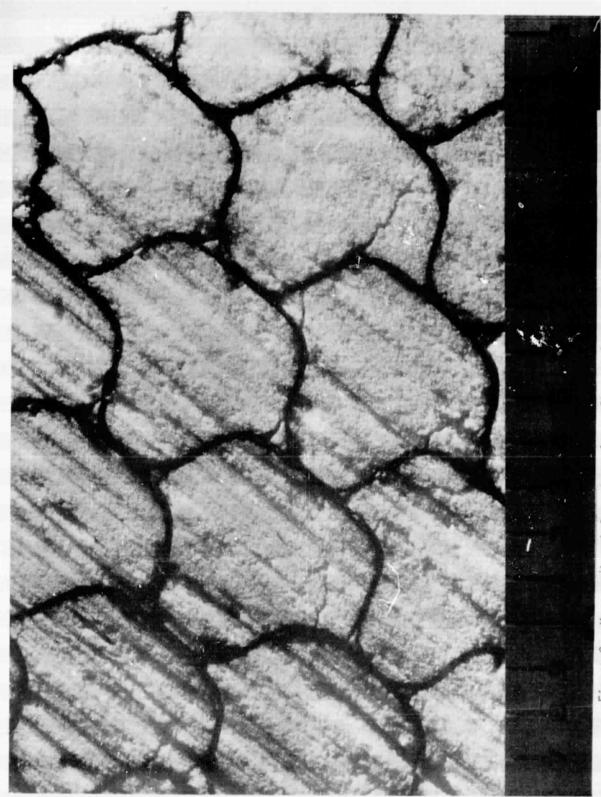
Honeycomb-reinforced specimen after sonic tests showing cracks.
